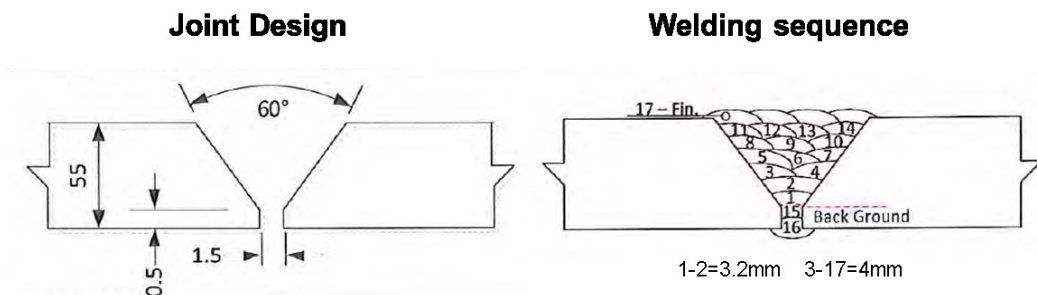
ASME IX weld preparation details and welding sequence. The plate was subject to PWHT after welding †
